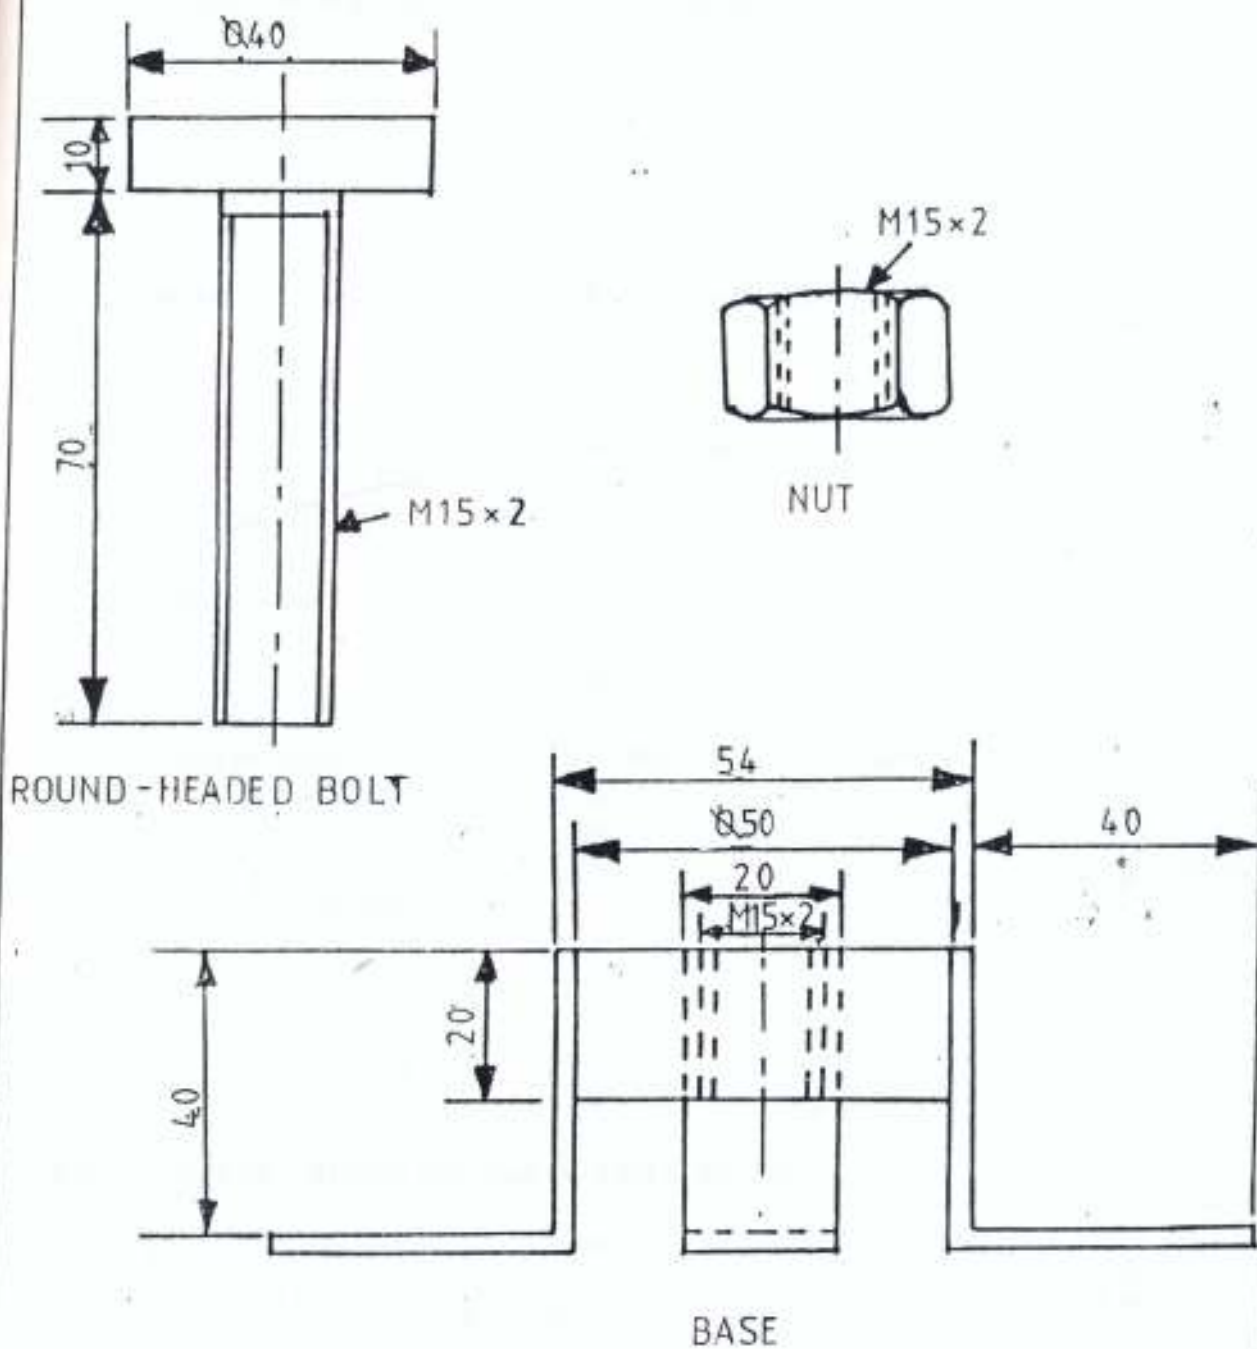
WORKING DRAWING FOR MECHANICAL DEVICE
